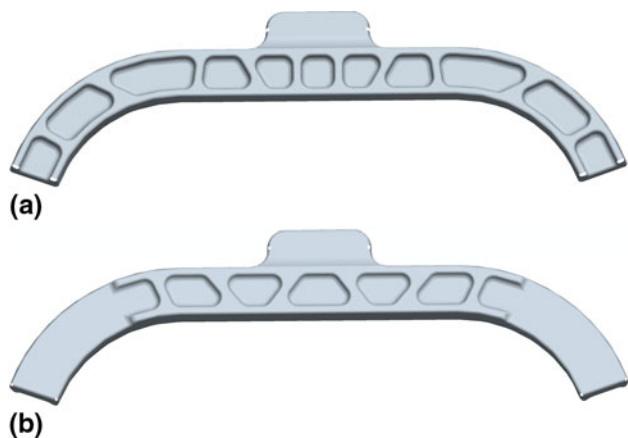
Geometrical model of large-sized frame forging of Ti-alloy (a) front side and (b) back side
